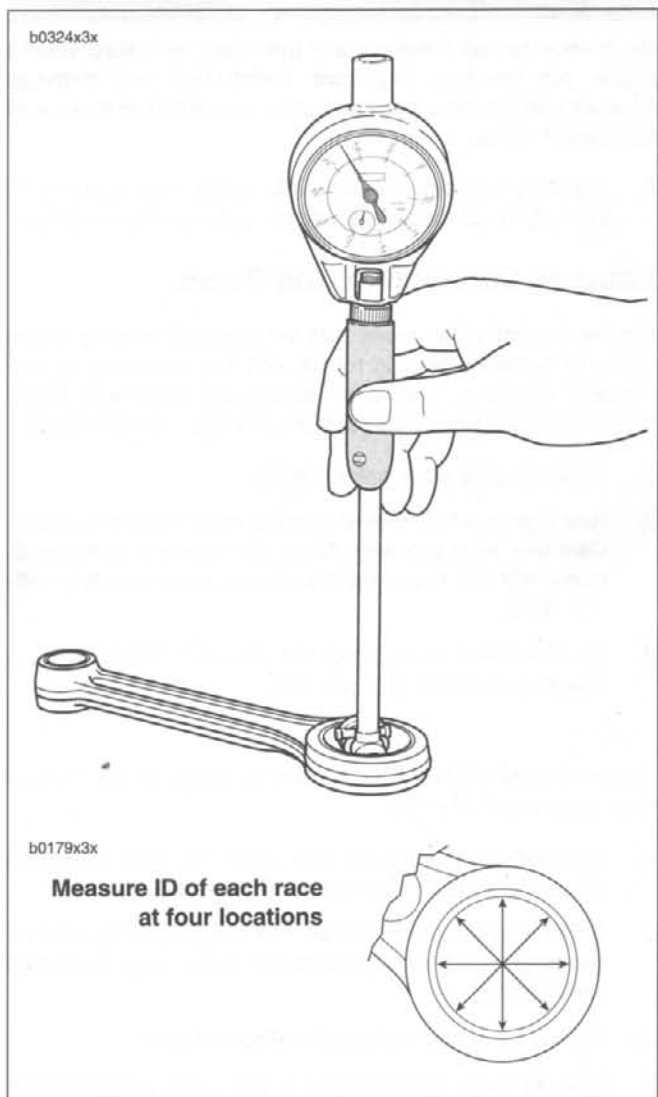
Measuring Connecting Rod Race Inside Diameter
